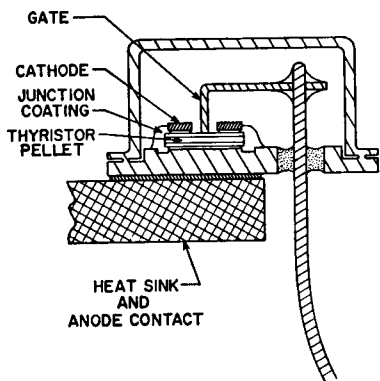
Cross-section of RCA two-lead TO-5 thyristor package.
